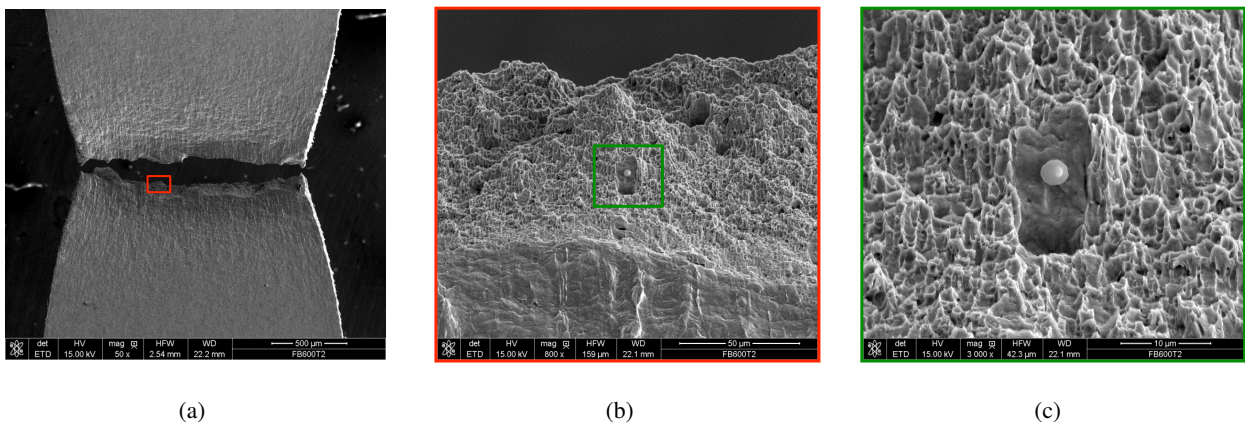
Fractographs of a fractured FB steel specimen in scanning electron microscope taken at different magnifications
